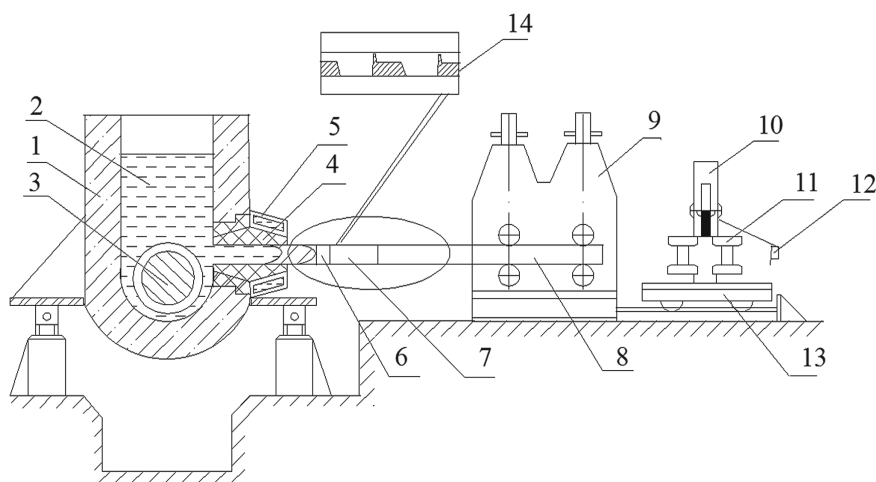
1 - Horizontal continuous casting machine of non-ferrous metal and alloy billets: 1 - housing metal; 2 - melt; 3 - mixer inductor for heating the melt; 4 - graphite mold sleeve; 5 - copper water-cooled crystallizer sleeve; 6 - cold billet head; 7 - measuring element with base; 8 - shank cold head billet; 9 - pulling stand; 10 - a flying circular saw; 11 - a device for clamping the billet before cutting; 12 - end switch; 13 - a trolley for moving a flying circular saw; 14 - force (or strain) station.
